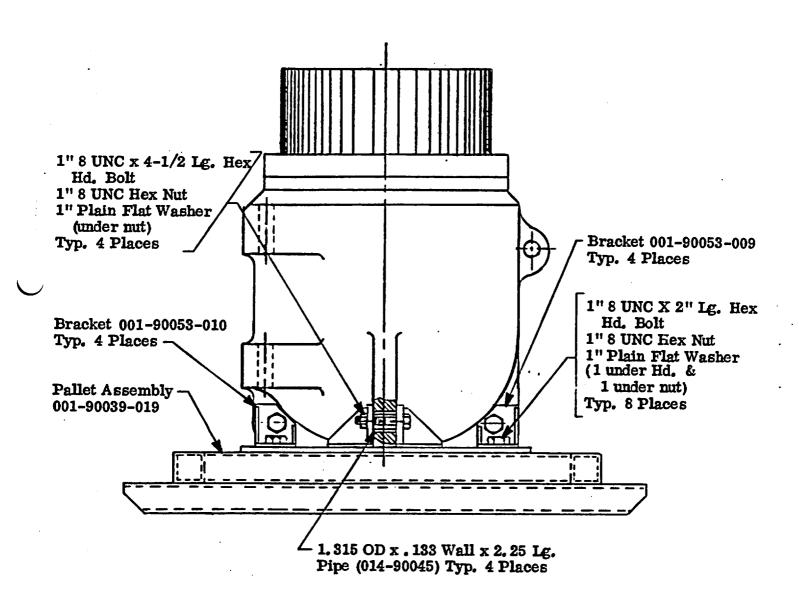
SENTINEL 25A GENERATOR/SHIPPING PALLET MOUNTING HARDWARE
